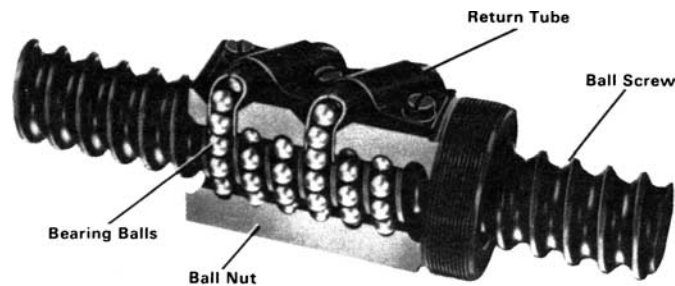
Ball screw assembly. (Saginaw Steering Gear Division, General Motors Corporation.)
